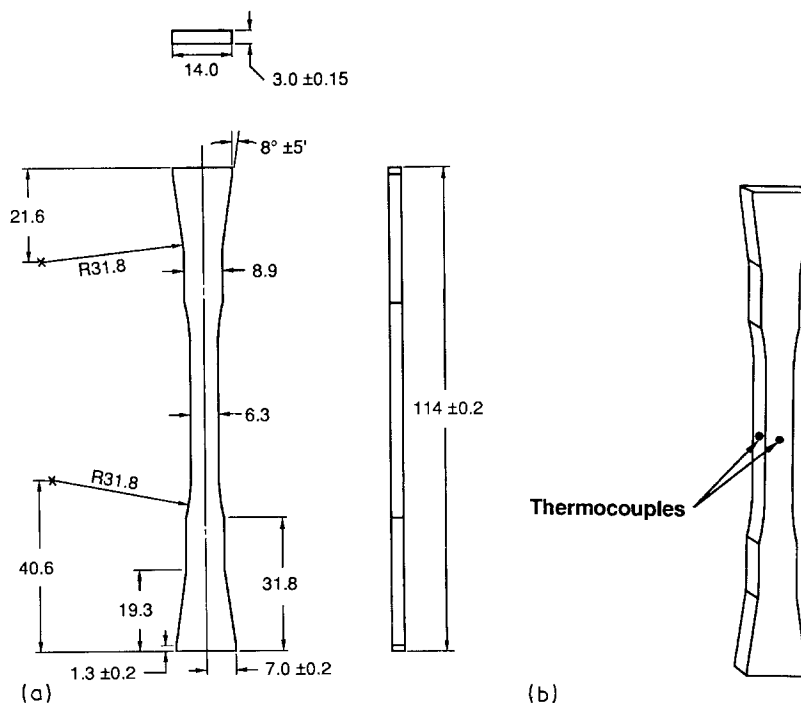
Specimen geometry and location of thermocouples used to determine temperature rise during tensile fatigue loading. Dimensions are in millimeters. (a) Specimen geometry, (b) location of thermocouples.
